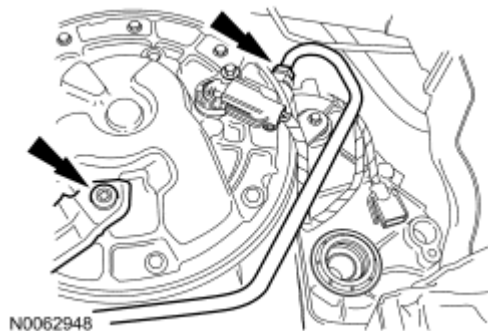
Identifying Bracket Bolt And Cooler Tube
